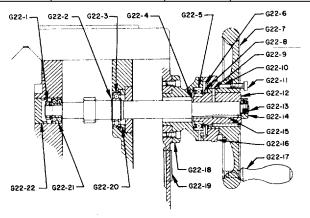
Apron – First Pinion Assembly without Power Rapid Traverse
